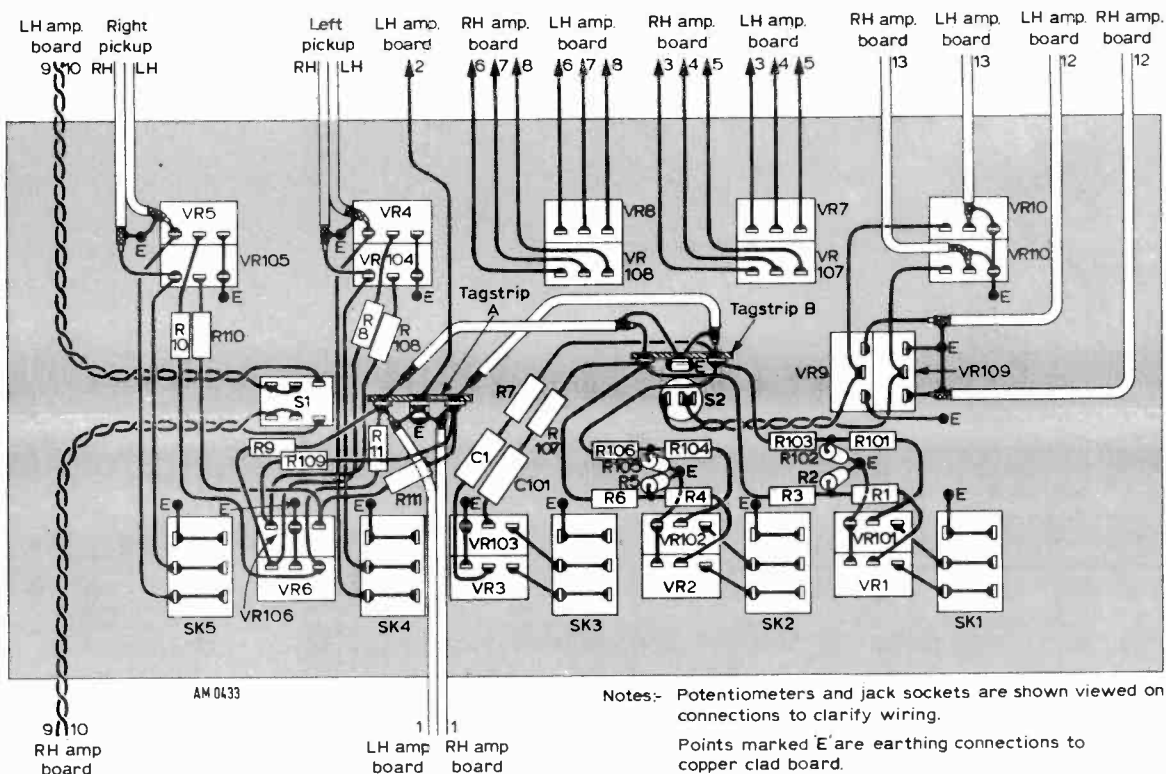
Construction of the mixer, made from double-sided copper board, one of the sides being used as a common earth plane.
